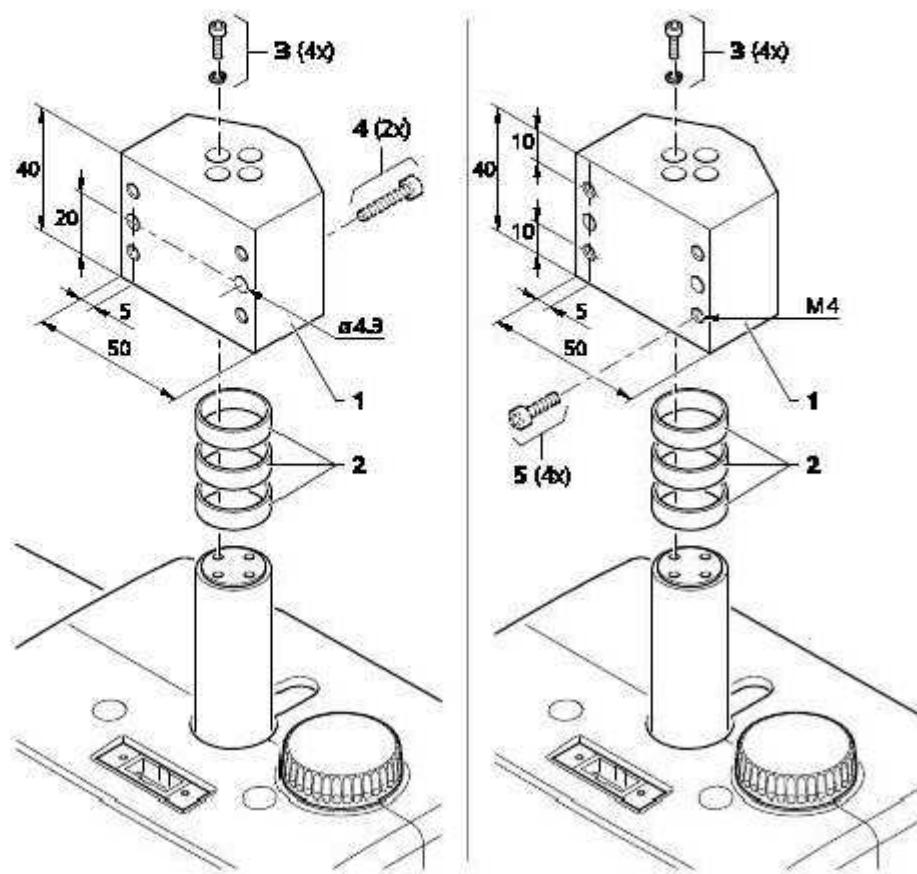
Interface dimensions for mounting the phoropter head with the assembly adapters ZDR14 and ZDR16
